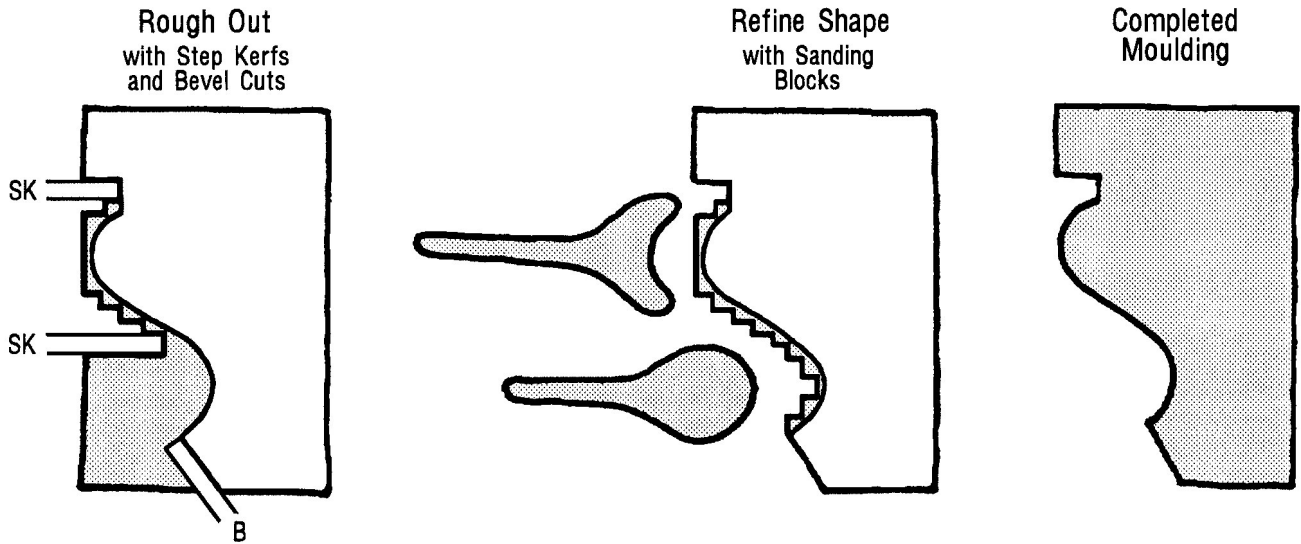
Fig. 1. A full-form moulding is begun on the table saw by wasting away unwanted wood with step kerf and bevel cuts (left), and refined with sanding blocks (center), forming the finished moulding (right).
